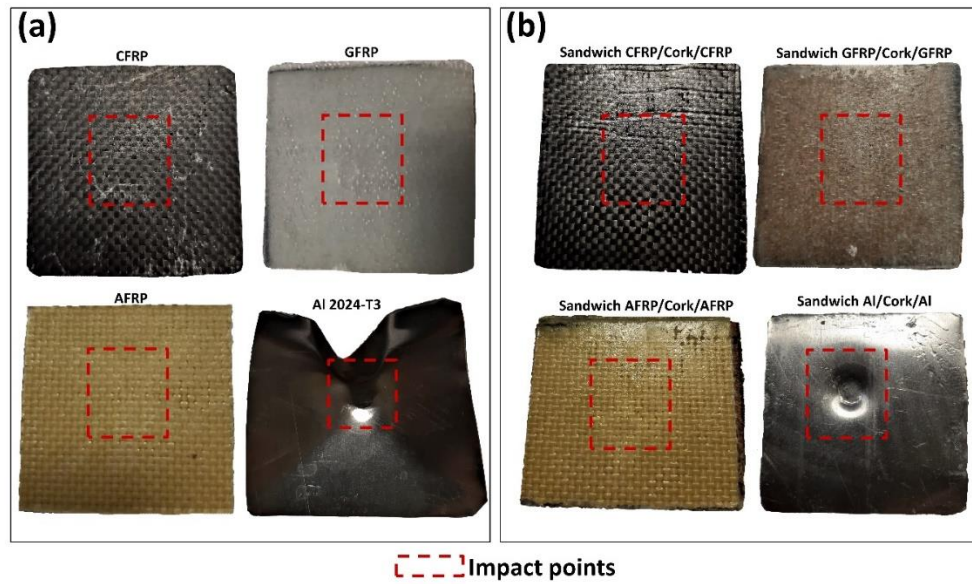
Face-sheet and sandwich structure deformation following drop testing from 0.30 m.
